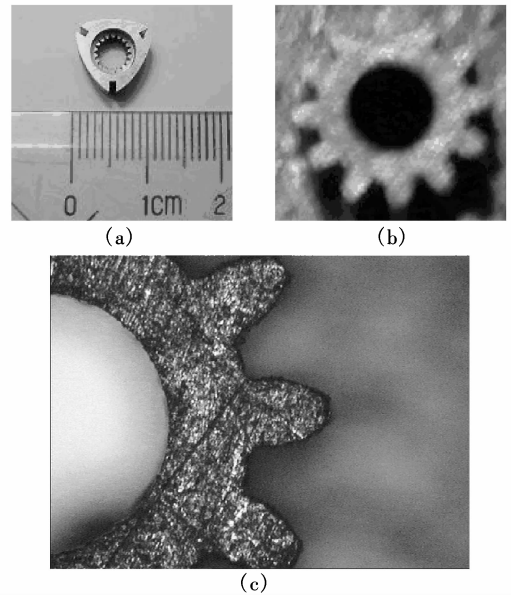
Gears machined with WEDM. (a) Internal gear; (b) External gear (pinion); (c) Enlarged photo of the pinion
